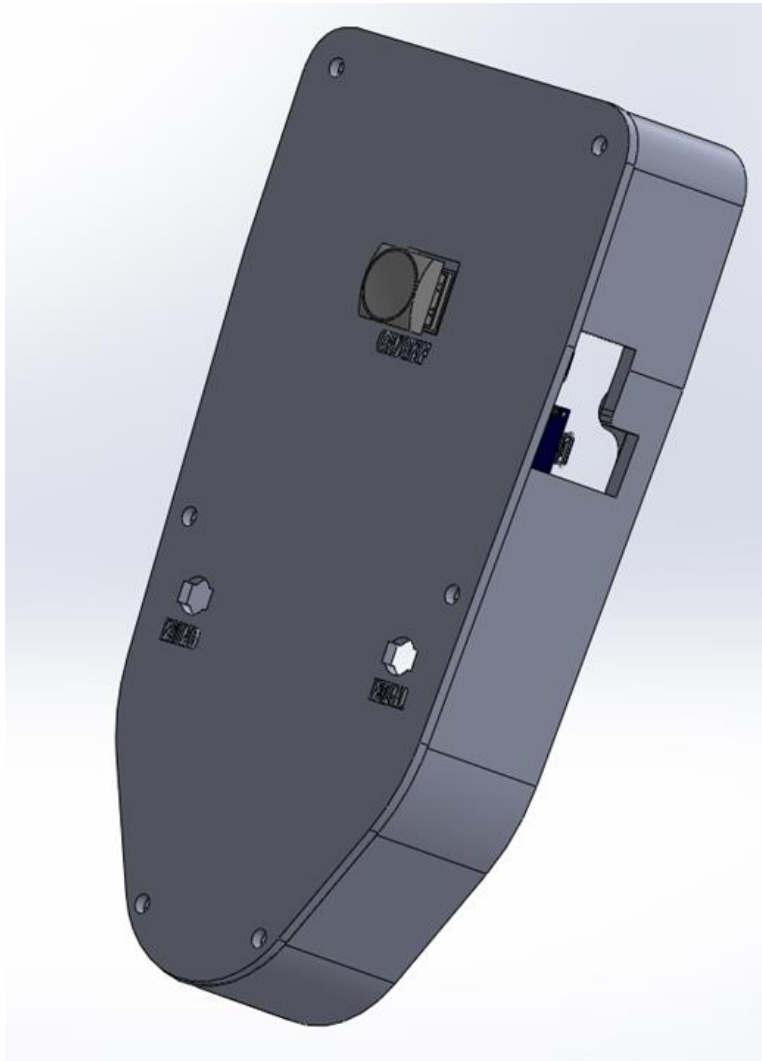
Completed Upper-Arm Cover: The assembled upper-arm cover showcases the successful integration of the PCB, with the Frontside and Sidewall segments seamlessly joined. A finished look ready for further testing and application.
